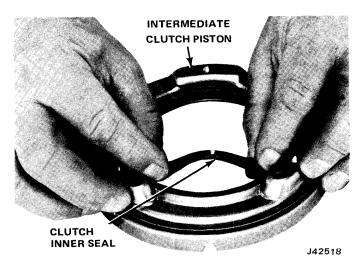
Installing Inner Seal on Intermediate Clutch Piston
